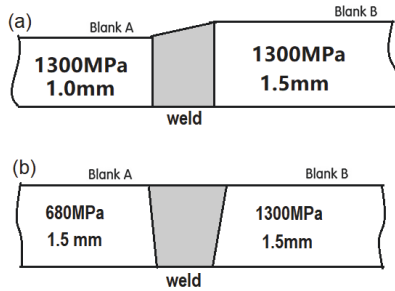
Weld cross section of spliced welds: (a) blank A (1300MPa@1.5mm) spliced with blank B (1300MPa@1.5mm); (b) blank A (680MPa@1.5mm) spliced with blank B (1300MPa@1.5mm).
